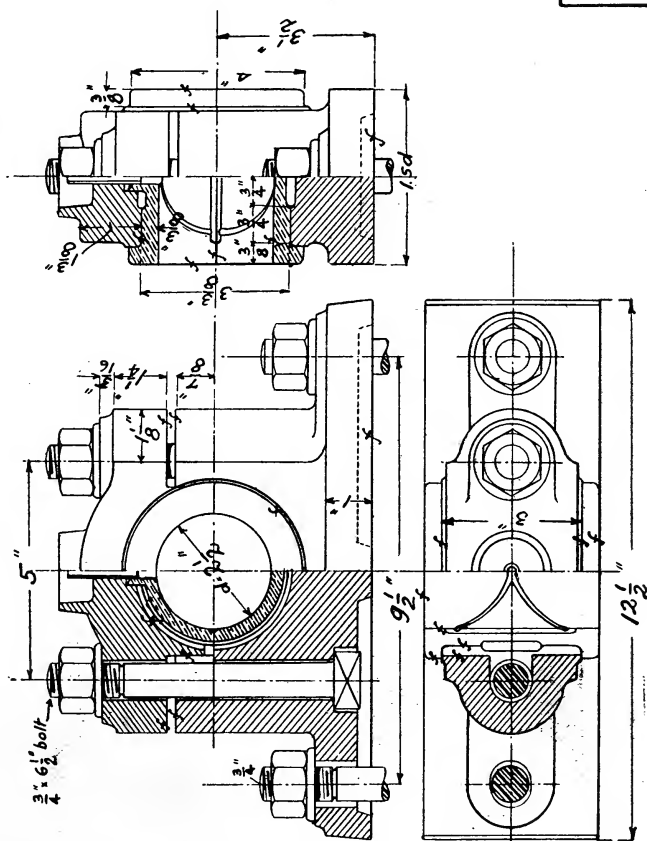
and 9.—The author strongly recommends at this point the use of larger machine models. Either of the following ones may serve as good objects: Shaft Coupling, Shaft Hanger, Pillow Block, Pulley, Bench Vise. Where no models can be obtained, make drawings of *Pillow Block* and *Seller's Shaft Coupling* from Plates 8 and 9. In connection with these plates study carefully the following rules: 4<sub>r</sub>, 4<sub>g</sub>, 5<sub>a</sub>, 5<sub>b</sub>, 5<sub>c</sub>, 5<sub>a</sub>, 6, 7, 8, 9, 11.
